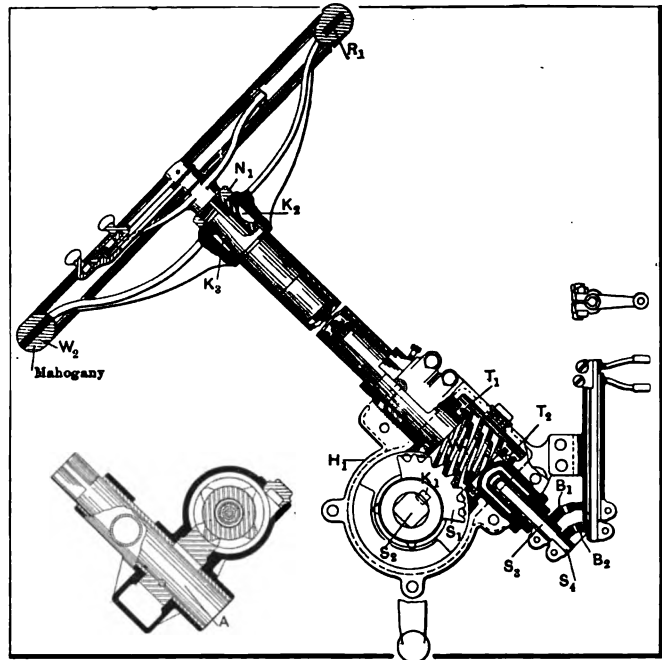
Worm-and-sector type of Gemmer gear with internally located concentrically disposed spark and throttle mechanism
